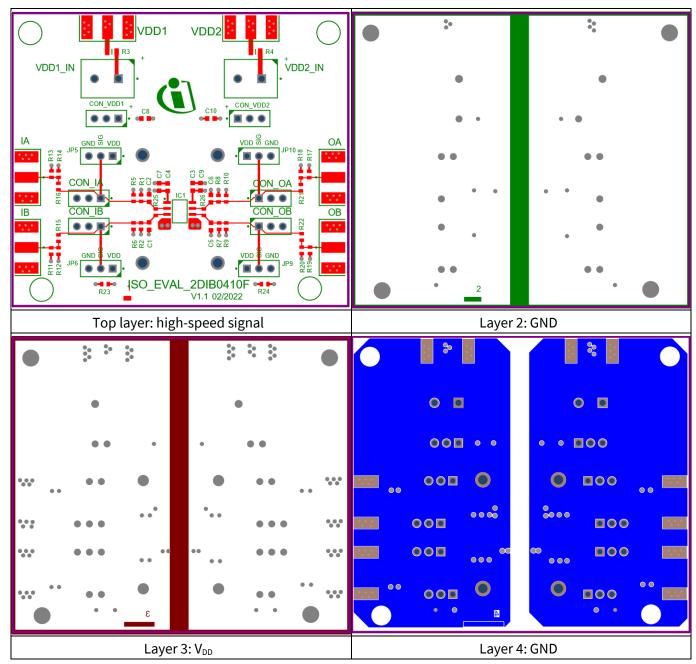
PCB layout of EVAL_ISO_2DIB0410F
